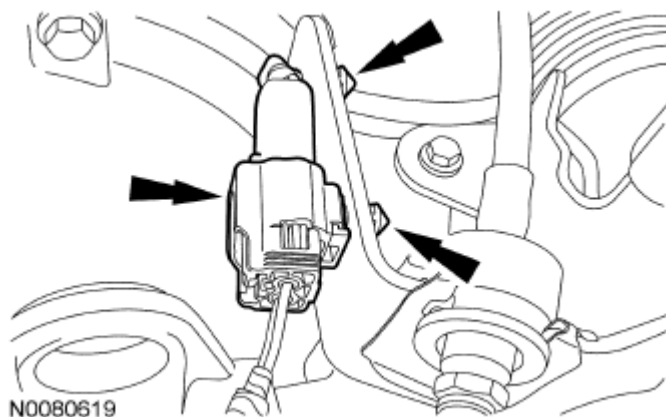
Locating Vehicle Speed Sensor Electrical Connector And Pin-Type Retainers
